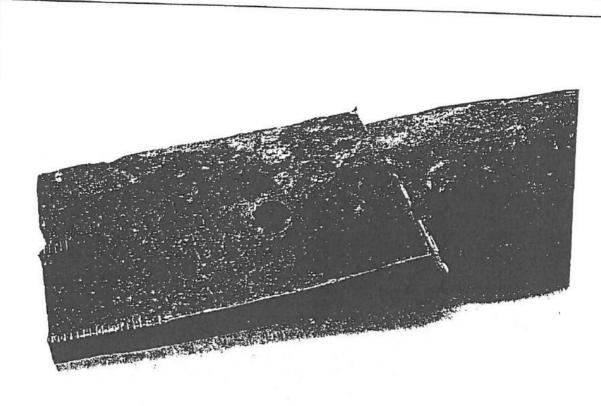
Showing a shear test on a rivetted sample carried out in tension. This sample failed by the plate pulling over the badly corroded head of the rivet.
